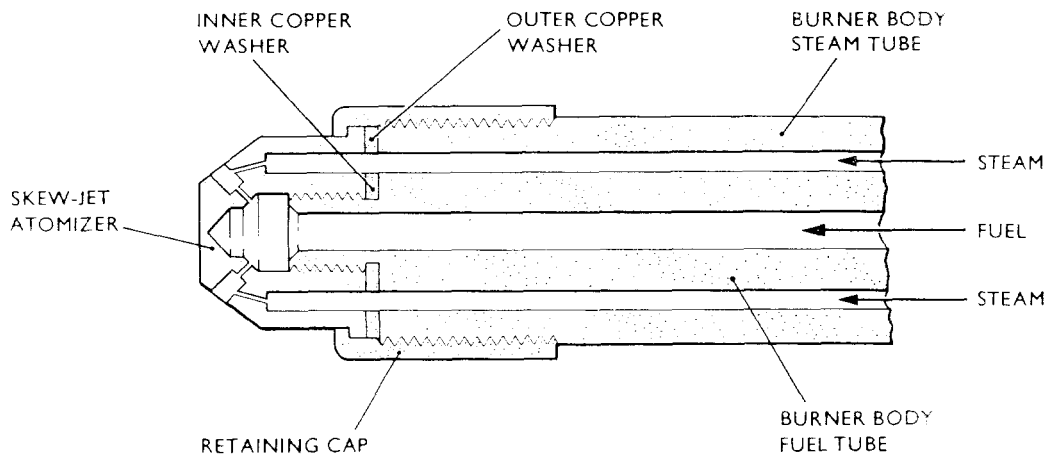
ASSEMBLY OF ATOMIZER AND BURNER BODY
